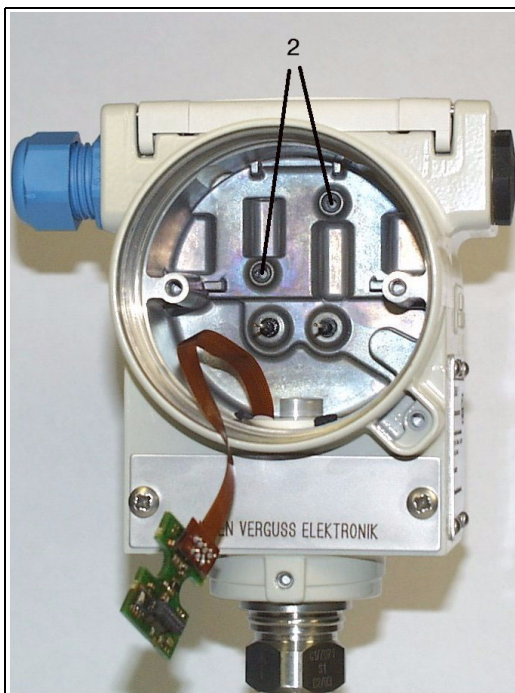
Position of the bolts (2) for fastening the keypad circuit board
